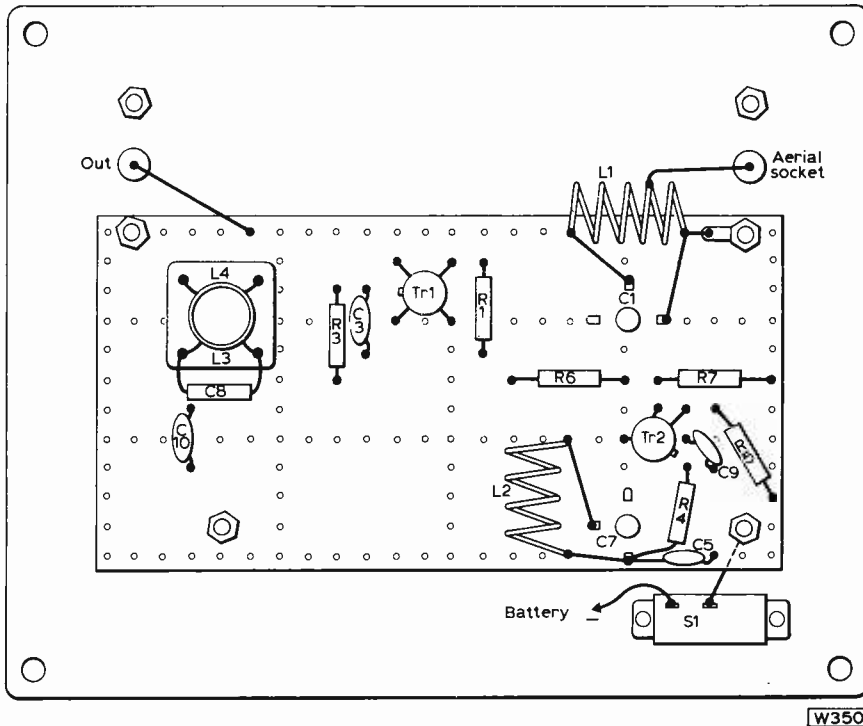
Layout of components on top of the board. The coils are soldered to pins in the board thus enabling the coils to be changed easily if necessary. Details of the coils are given in the text. The tap on L1 should be about a third of total number of turns up from the "earthy" end.
